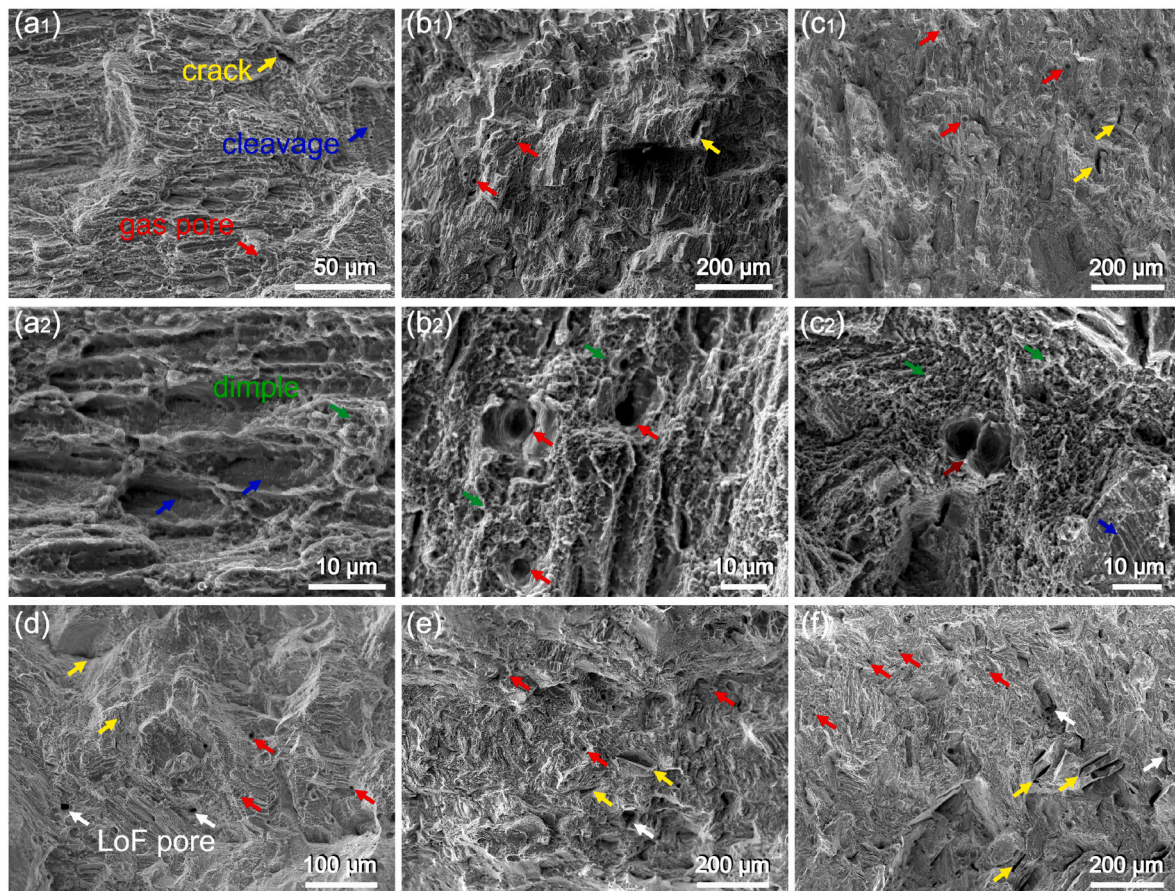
Fracture morphology of tensile tested samples: (a) stripe-F, (b) stripe-H and (c) stripe-V samples; (d) chessboard-F, (e) chessboard-H and (f) chessboard-V samples.
